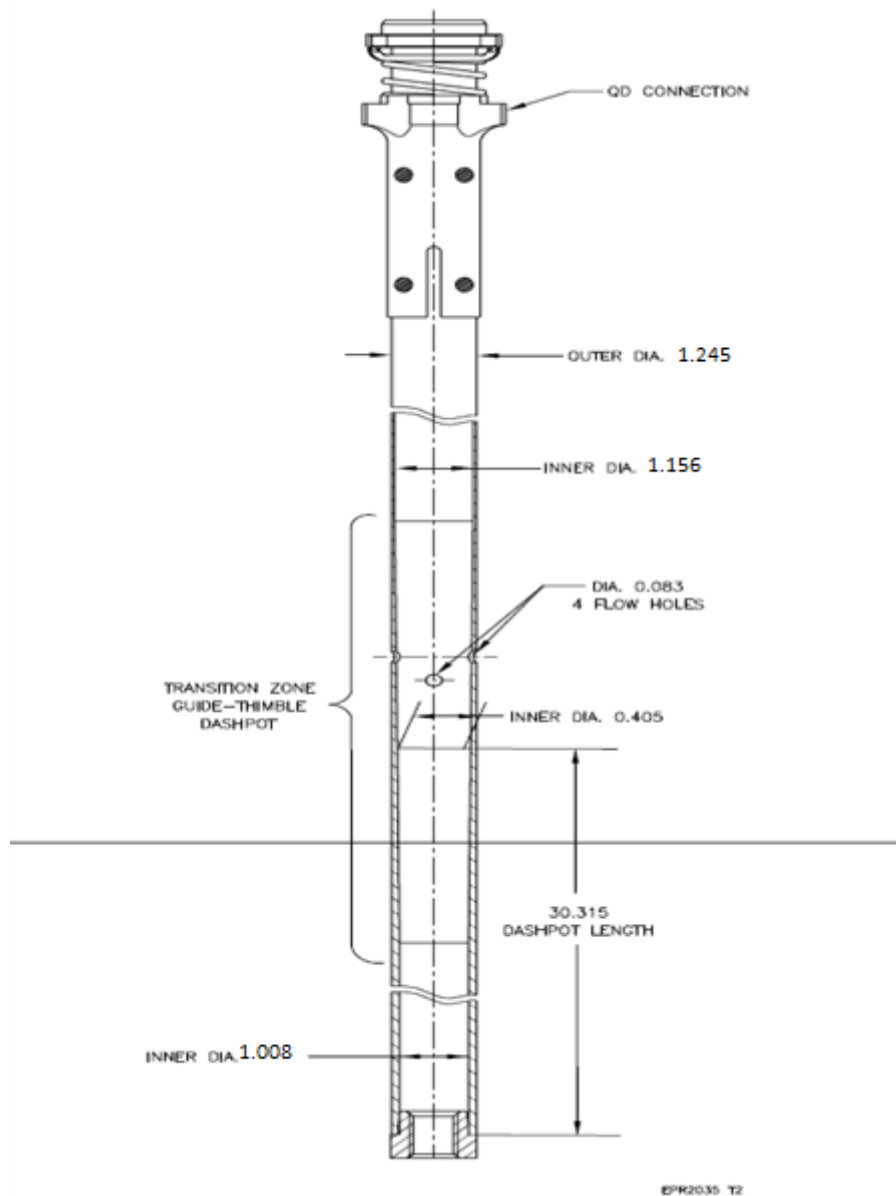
5 Guide Tube Assembly (AREVA, 2012)
